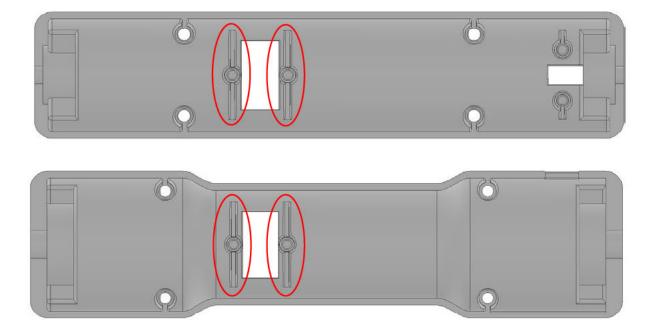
Rocker switch mounting bosses on handle option A (top) and option B (bottom)
